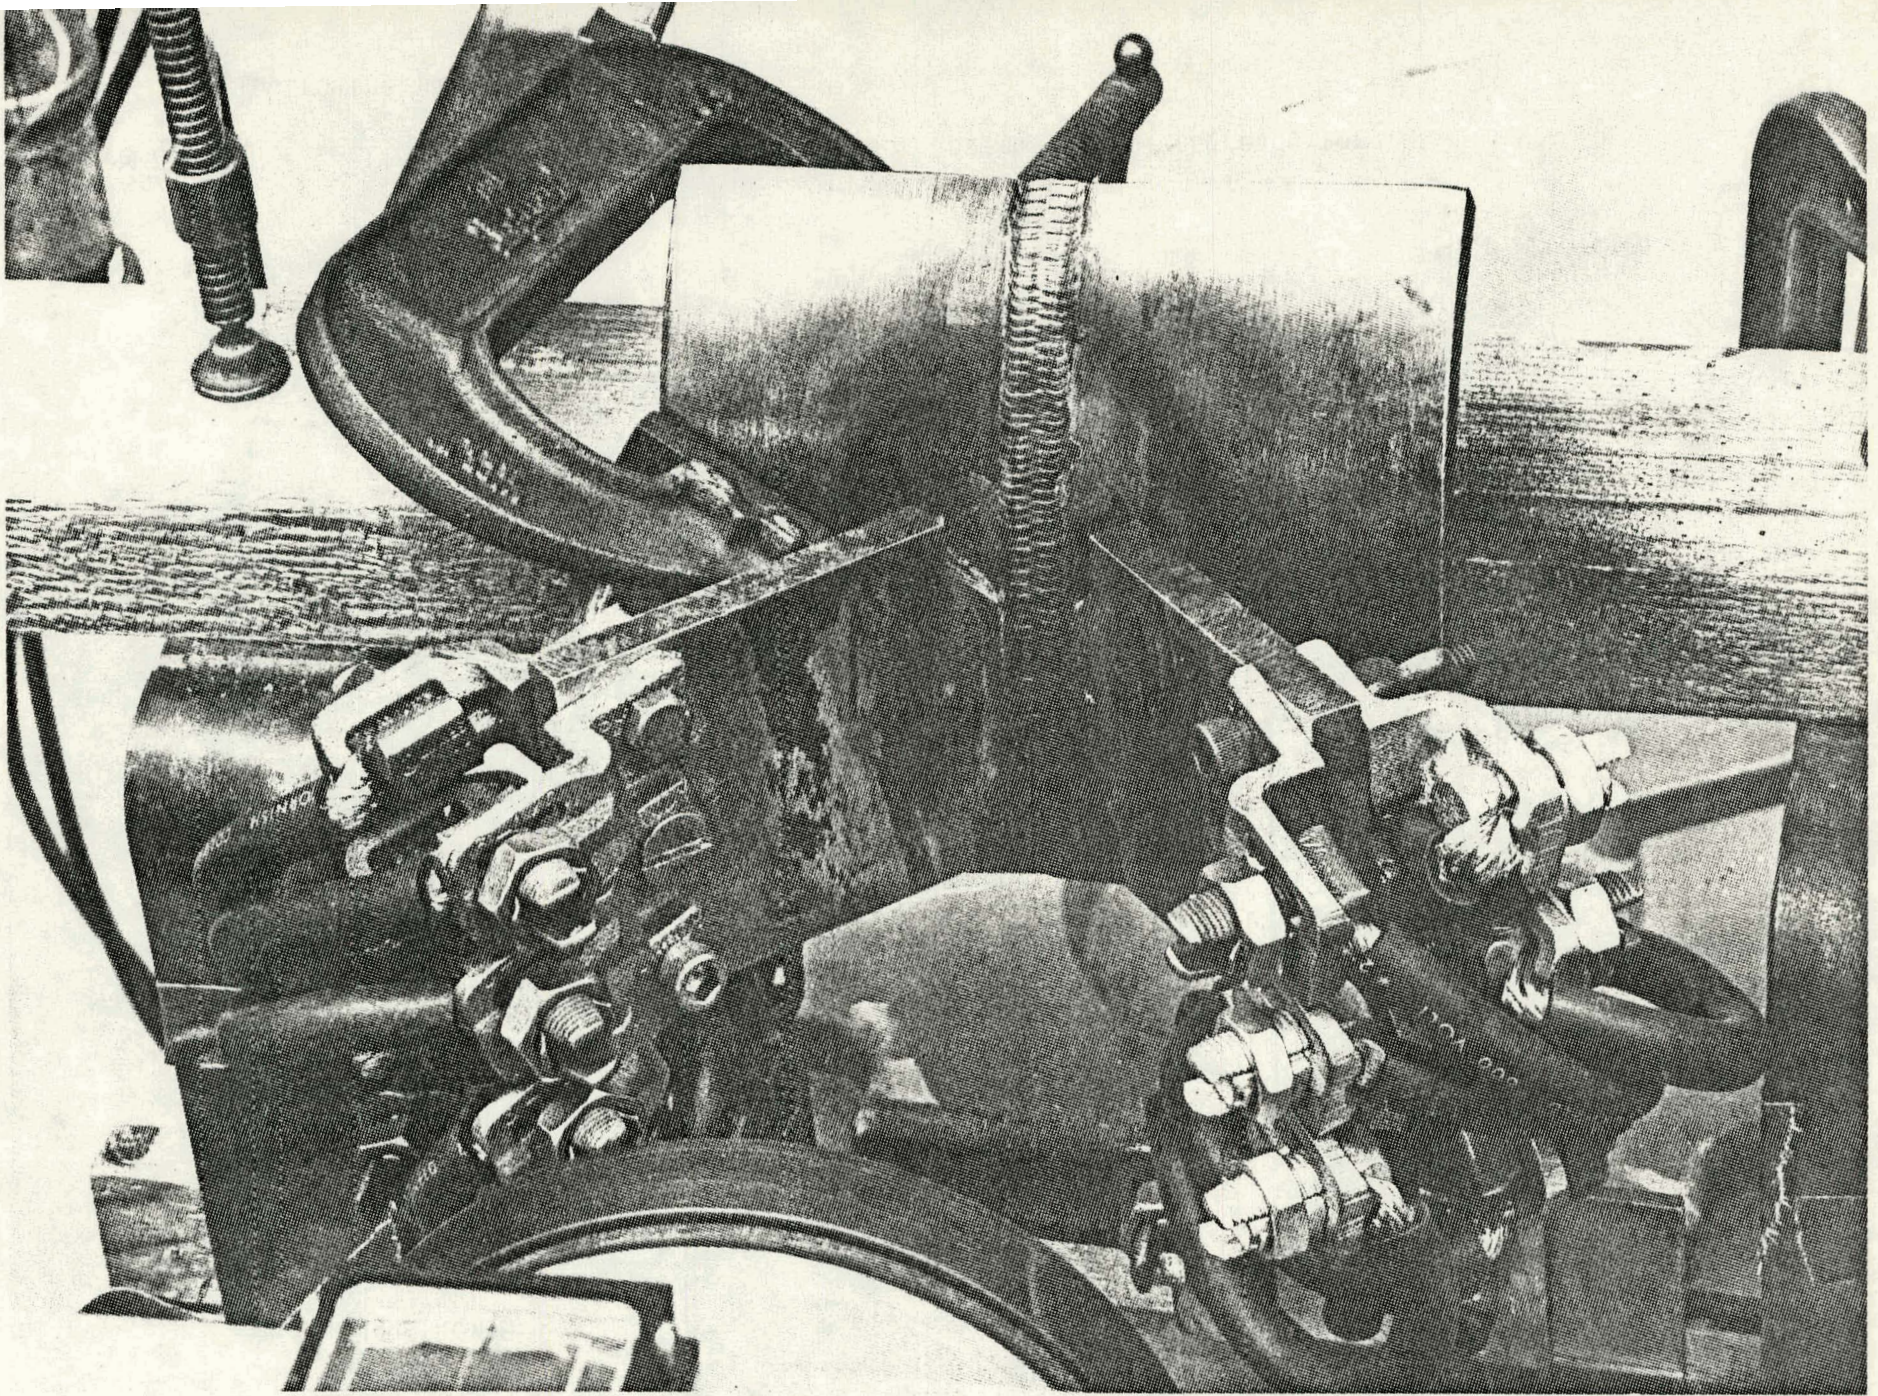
Front view of the stainless steel pipe weld specimen with early soldered-on electrodes used to collect comparison data. This specimen is from a 14 inch (36cm) diameter pipe.
